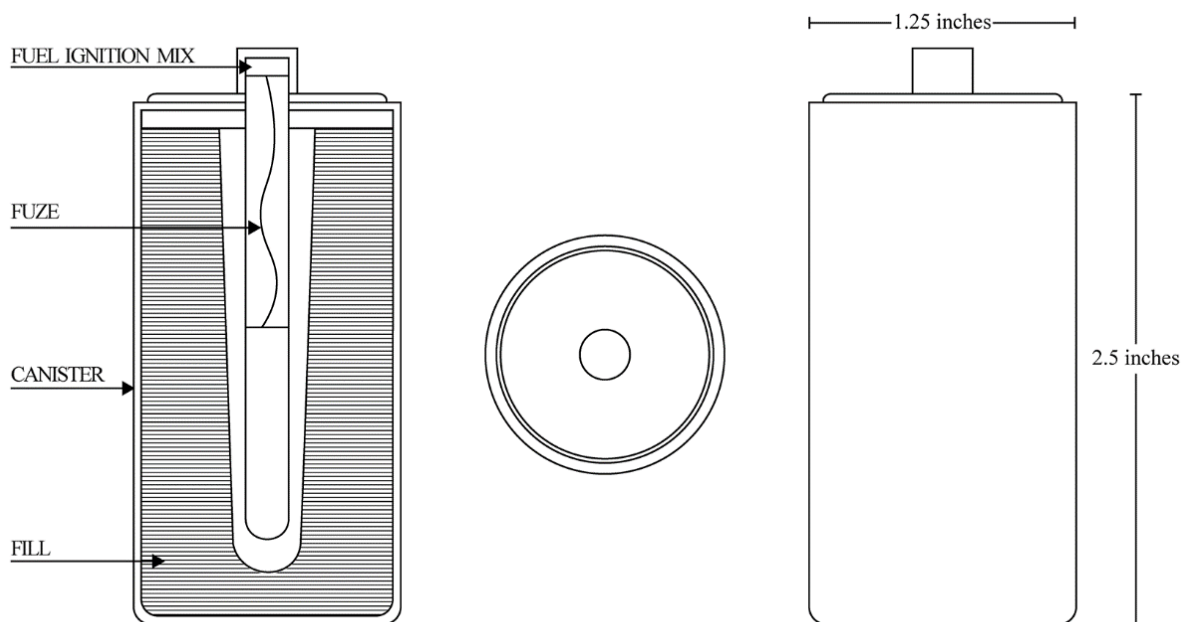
Bomblet, Chemical, BLU 50/B, BLU-39/B23 - Line Drawing
